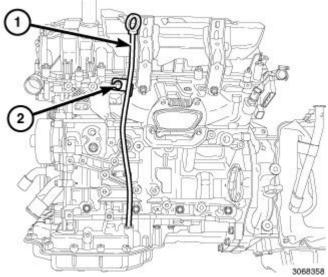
Oil Level Indicator Tube & Bolt Courtesy of CHRYSLER GROUP, LLC
